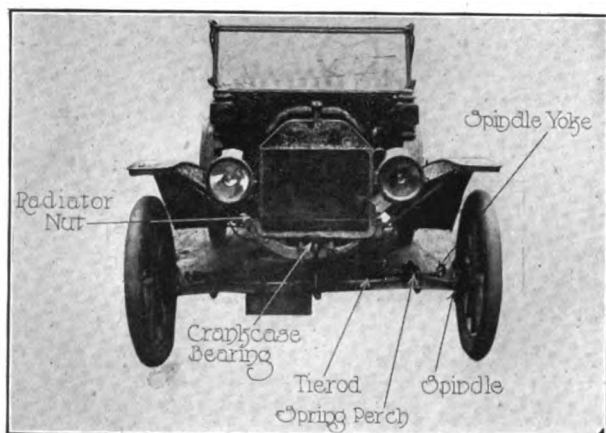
Components Requiring Inspection in the Overhaul of the Chassis.
